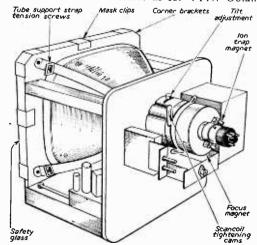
Details of the tube assembly on Models V14 and V14C. See notes above.
